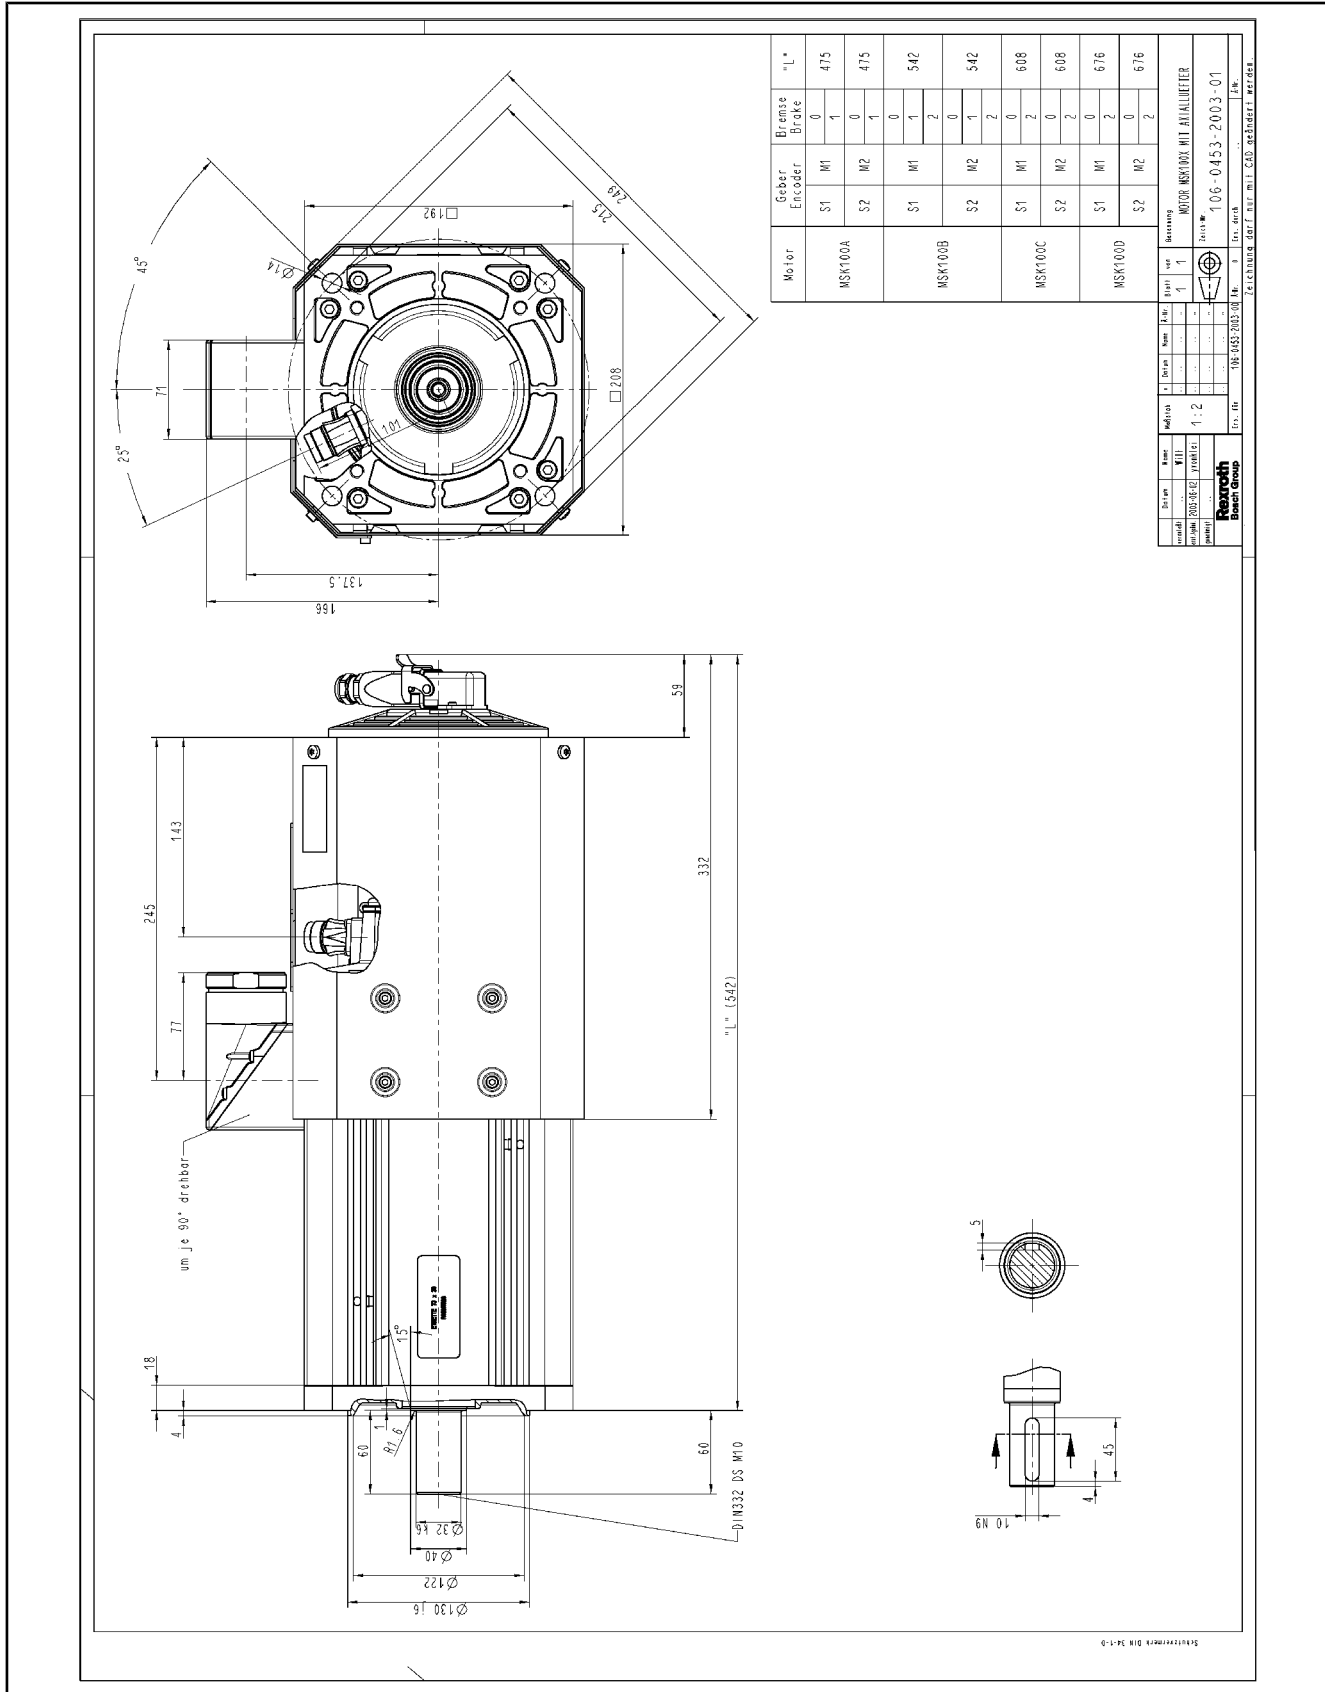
Dimension sheet MSK100 with axial fan unit
